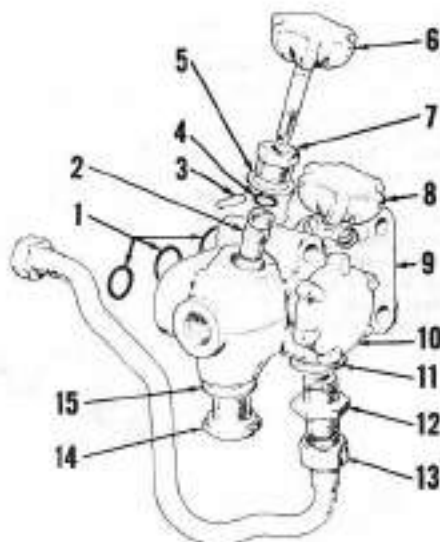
Exploded view of early type three-way valve assembly used on early models 770, 880 and 990.
